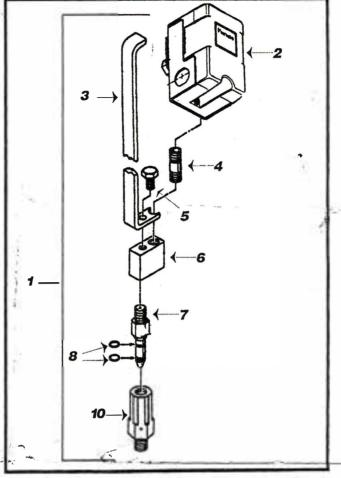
EXPLODED VIEW OF 0AWSP CONTROL KIT
